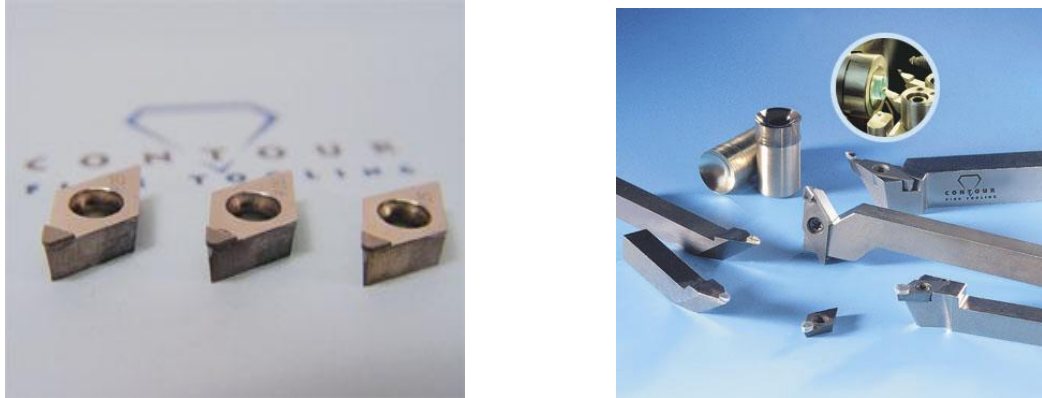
Cutting tools: (a) CVD diamond cutting tools, and (b) Diamond cutting tools (Contour Fine Tooling Ltd, n.d.)
